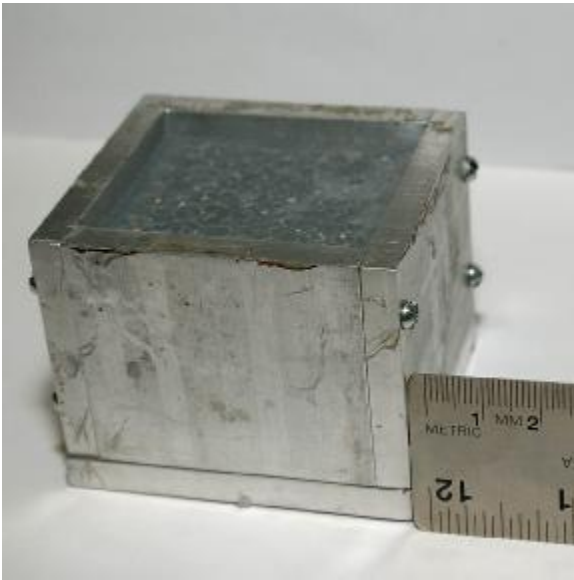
Mold before disassembly and removal of the hybrid specimen (i.e. step 6).
